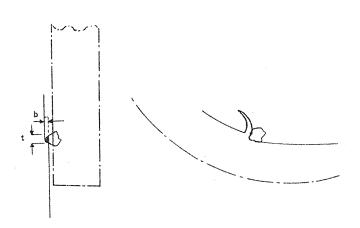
TRUE SIDE-WHEEL GRINDING.
